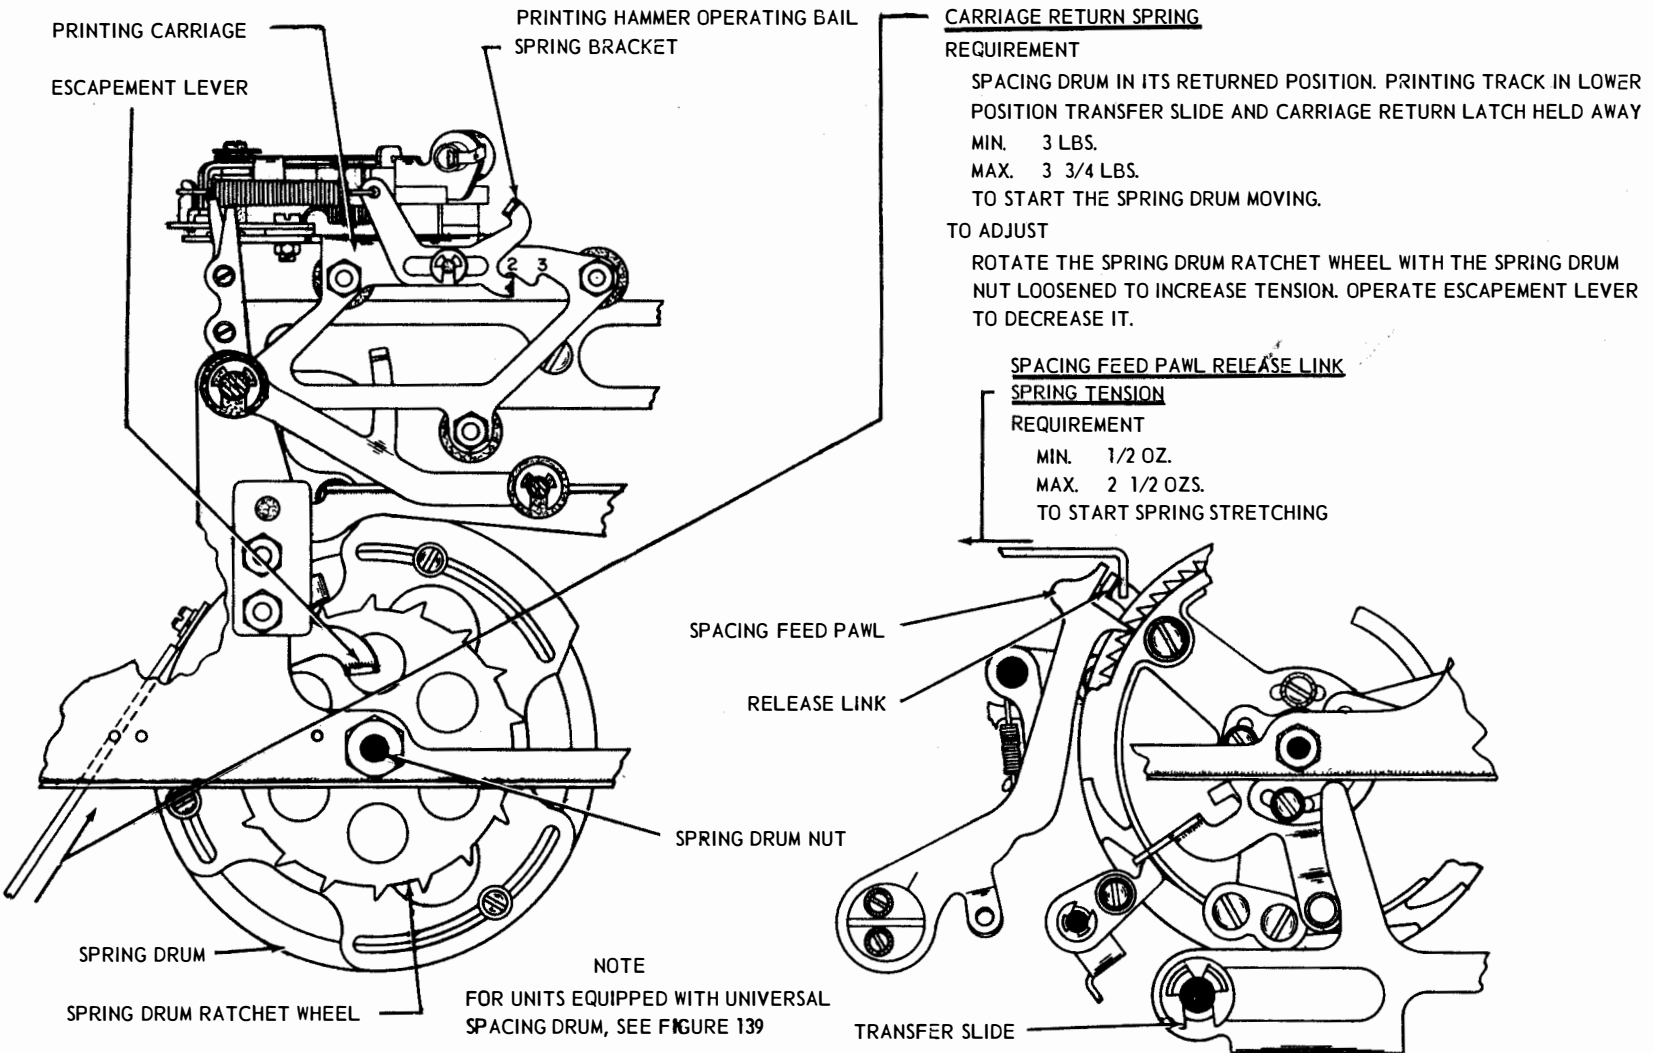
Automatic Typewriter, Carriage Return Mechanism, Front View
